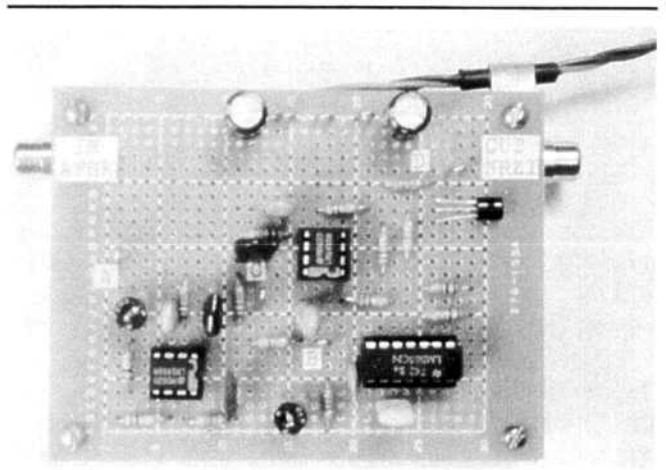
AFSK-to-NRZI assembly mounted on a 2 3/4 x 3 3/4-inch perf board.
